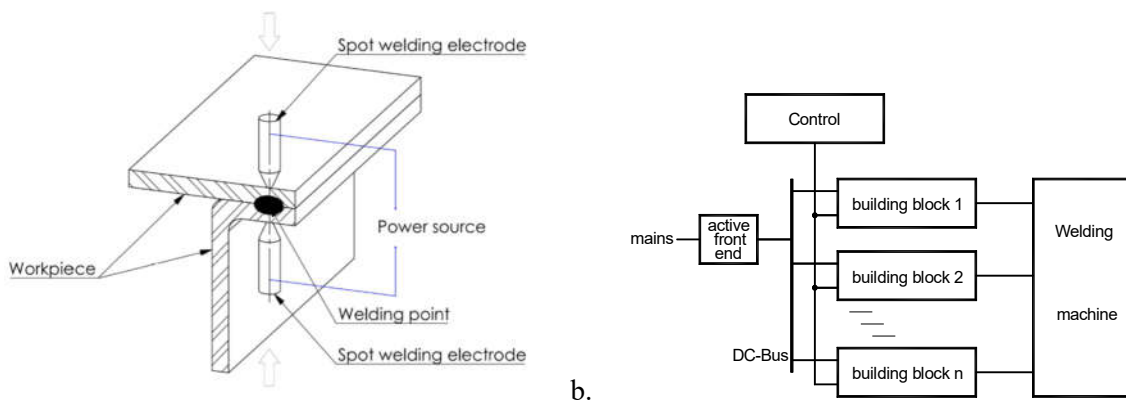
(a) principle of spot welding, (b) concept.
